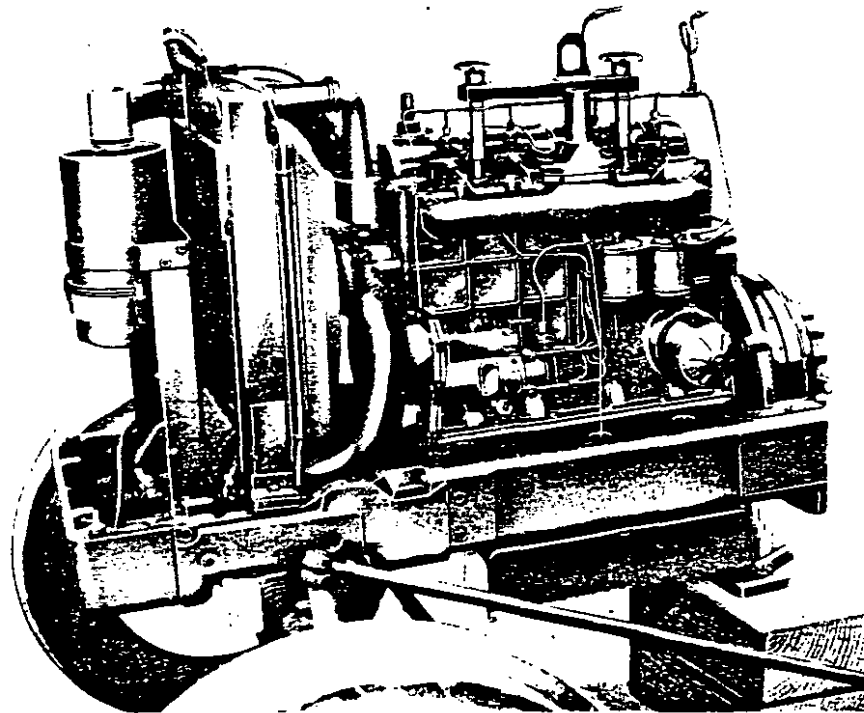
990 TRACTOR 'SPLIT' FOR ENGINE REMOVAL
